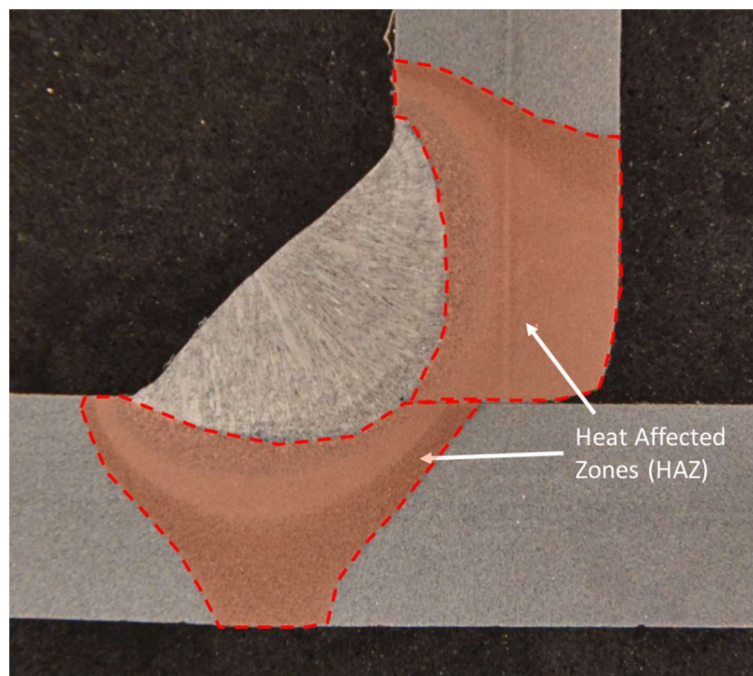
Fillet weld heat affected zones (HAZ)
